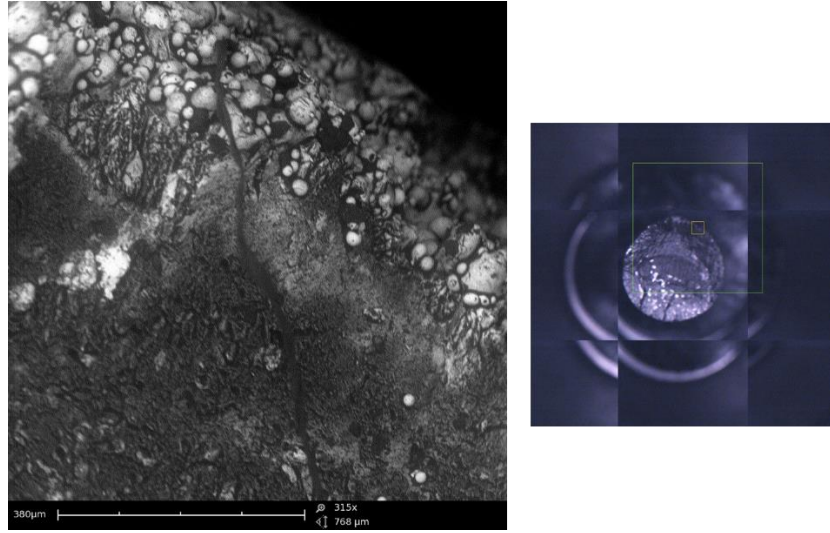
Fracture surfaces of sample subject to progressive amplitude fatigue testing: sample 19 (X), in which a rough surface is observable
